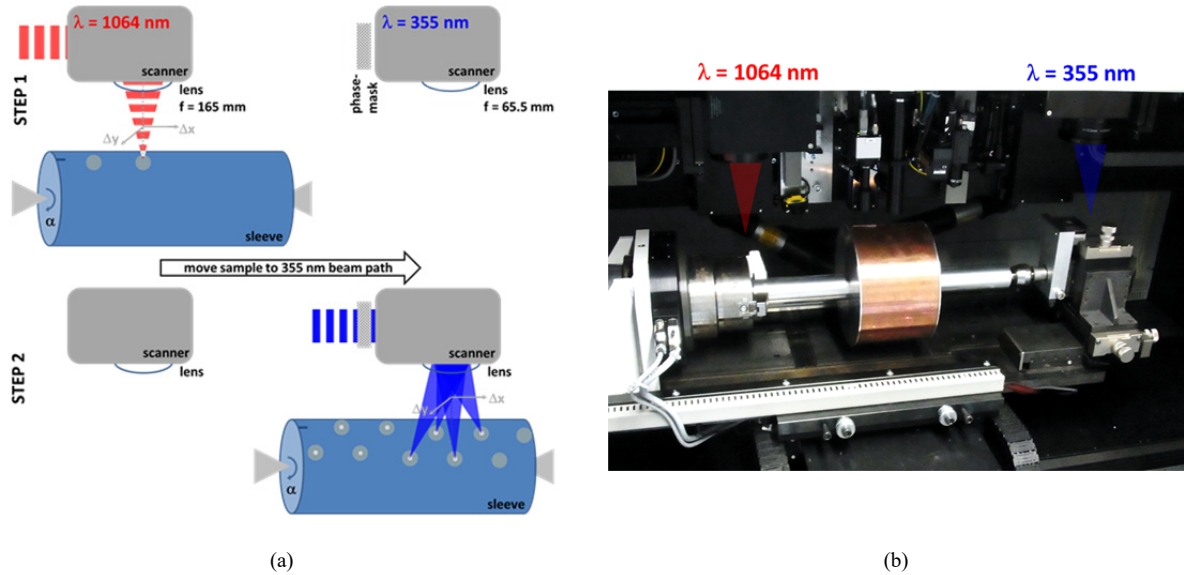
(a) Schematic illustration of the laser process steps for hierarchical pattern writing on sleeves by combining 1064 nm single spot and 355 nm multi spot processing.
